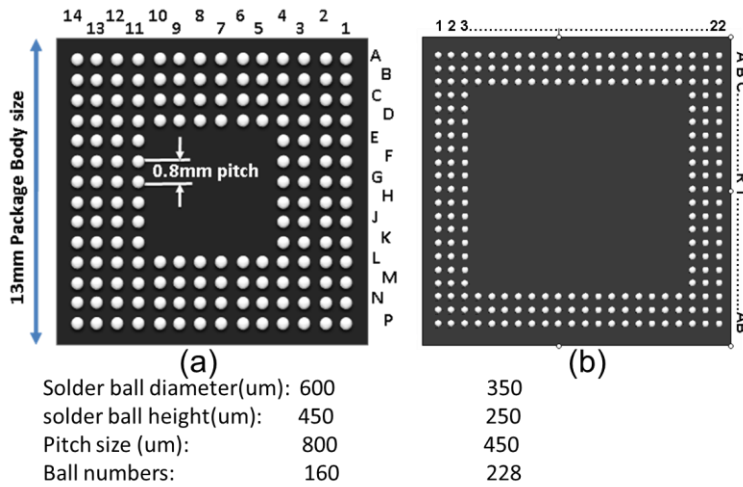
The schematic drawing of the solder joints layout in BGA packaging assembly.
